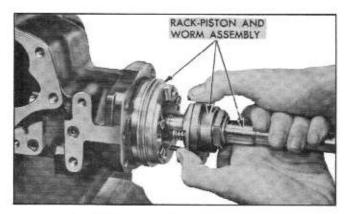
Removing Rack-Piston and Worm Assembly
